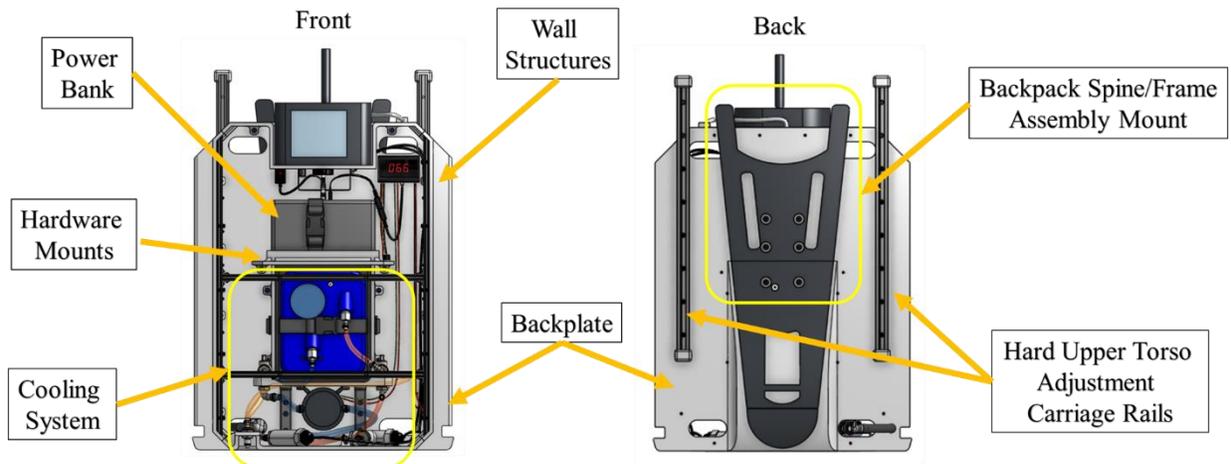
Overview of the HS3 2.5 PLSS Assembly
